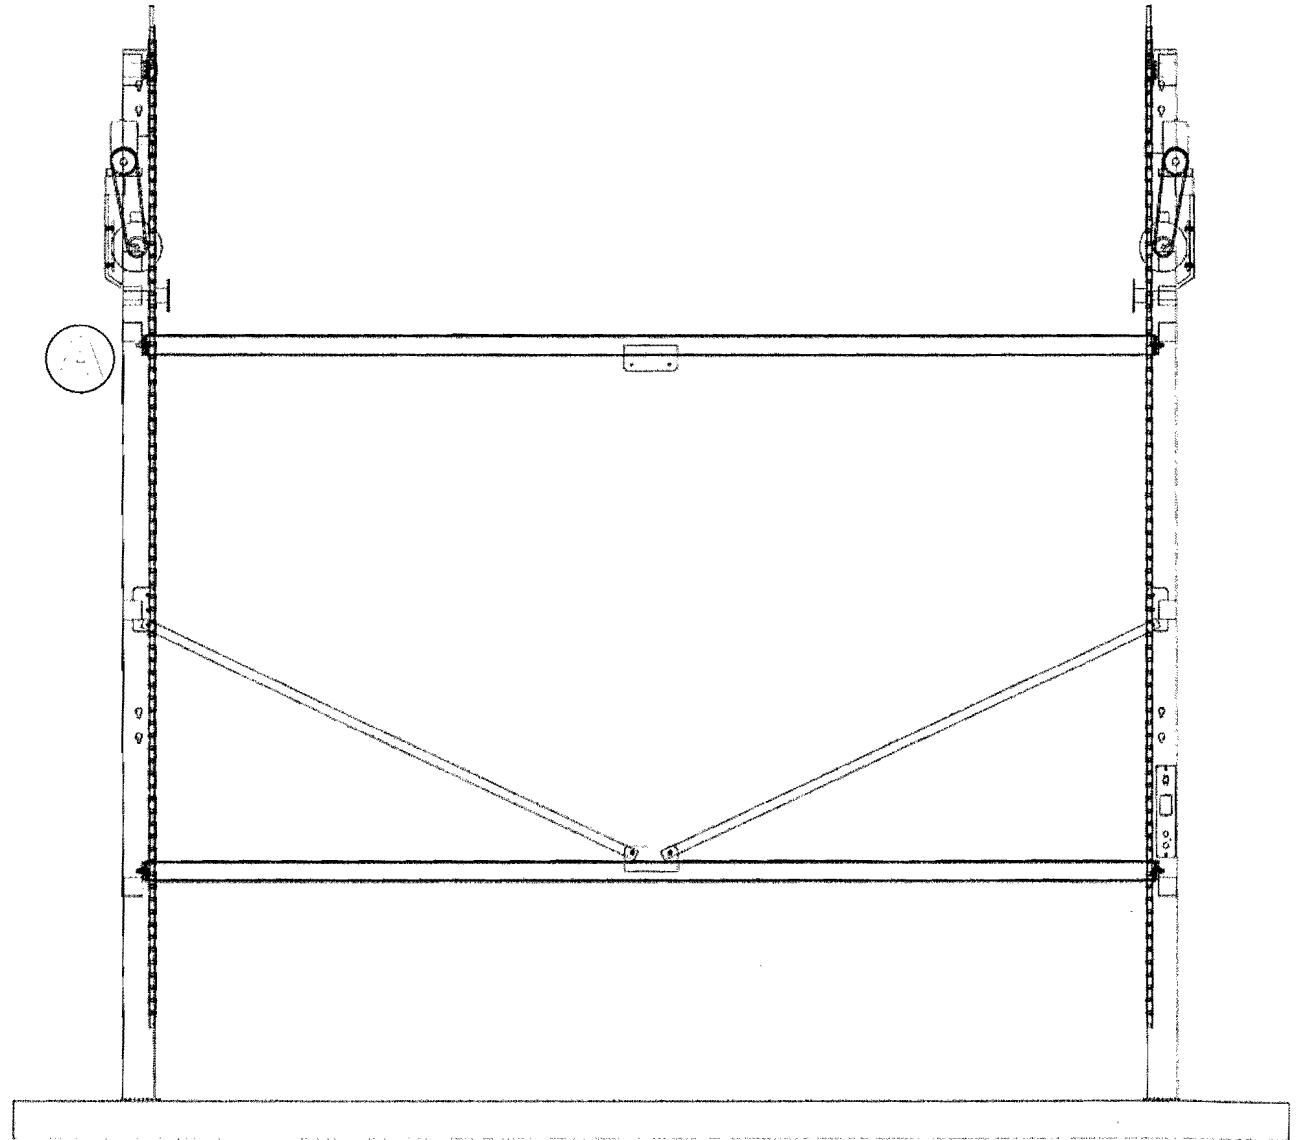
INSTALLING THE TOP DIAMOND BRACES
